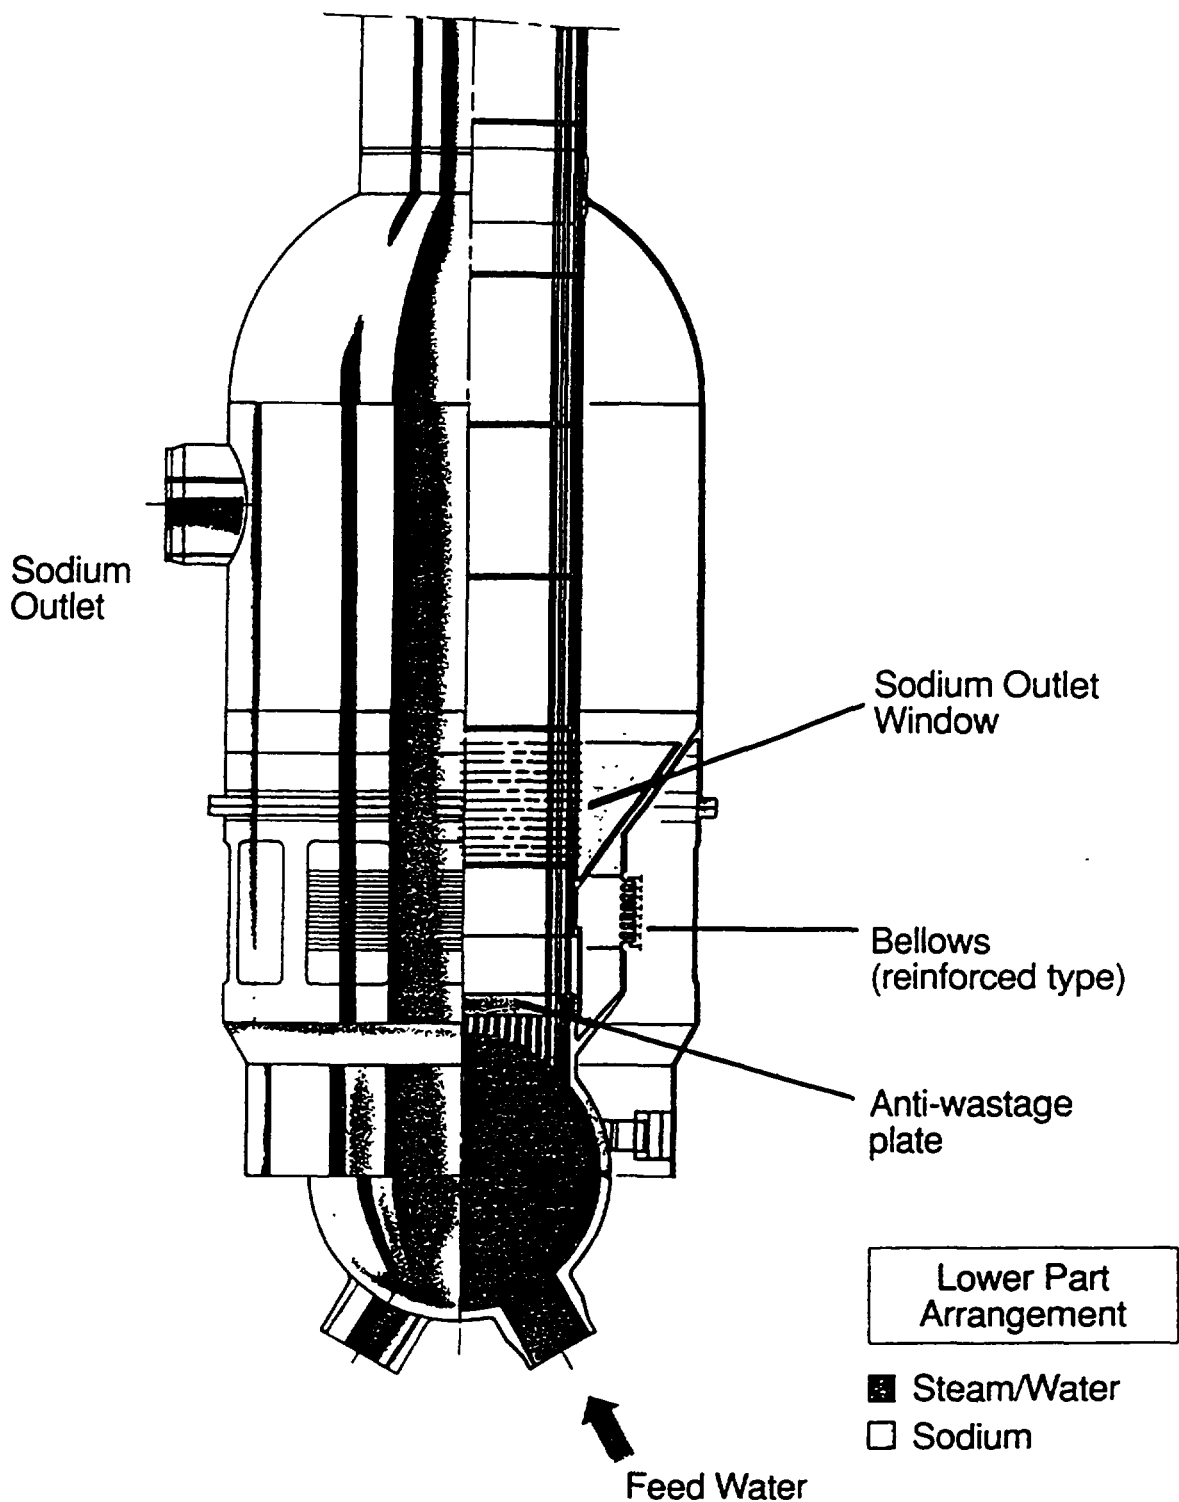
Steam generator unit - Bottom end detail drawing
